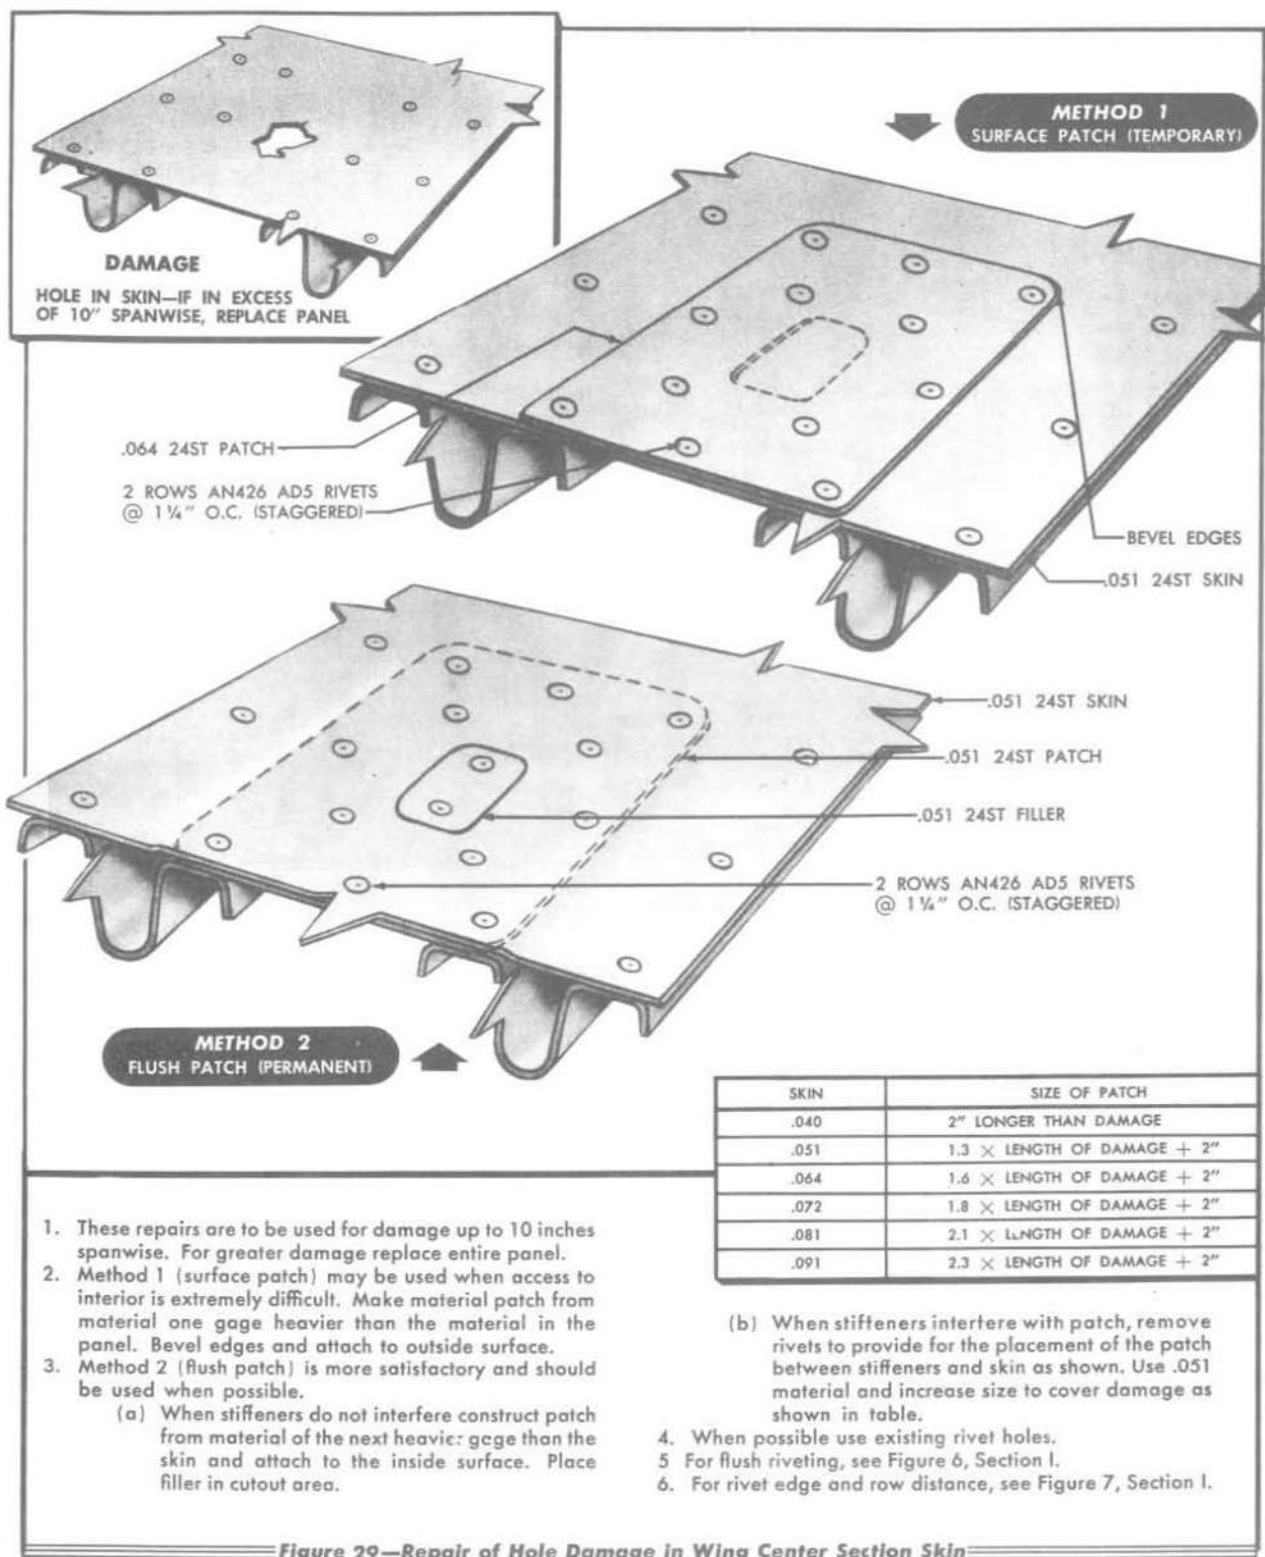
Repair of Hole Damage in Wing Center Section Skin
